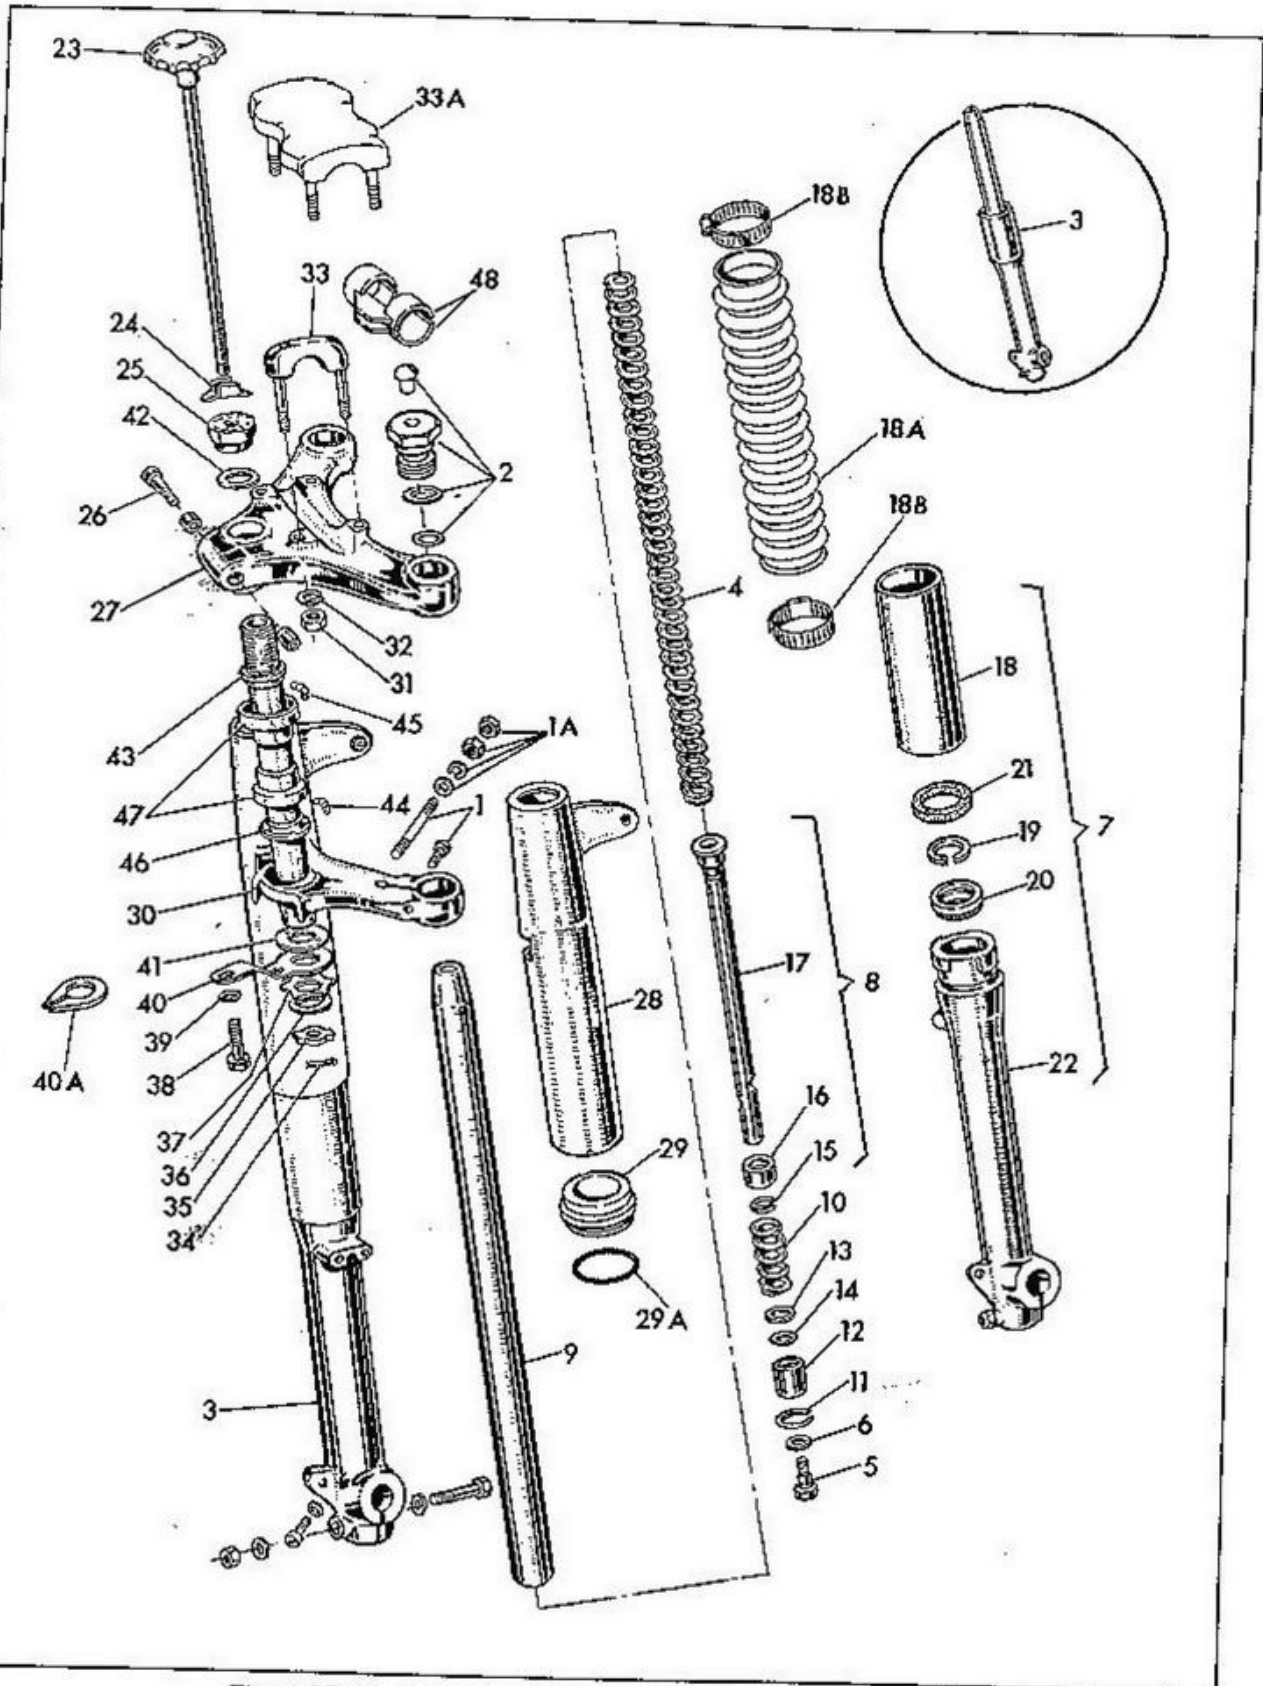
F-54. Front Fork (1970 and Earlier) - Exploded View
